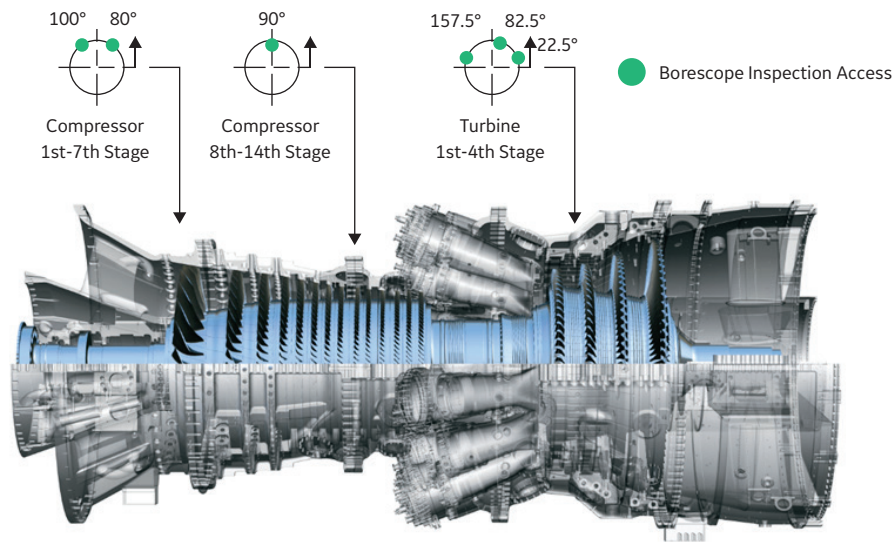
7HA.01 gas turbine borescope inspection access locations
